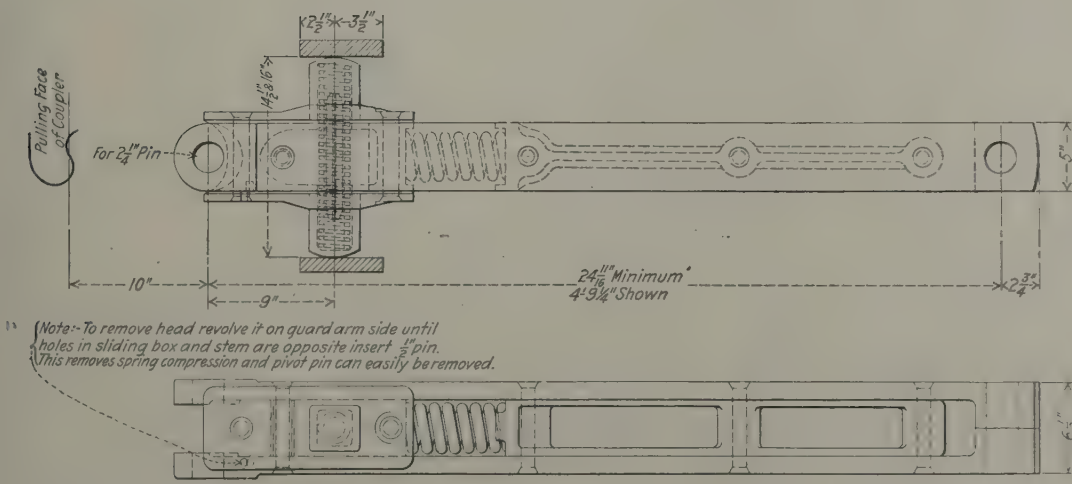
Coupler Stem for Pitt Passenger Coupler. The McConway & Torley Company.
